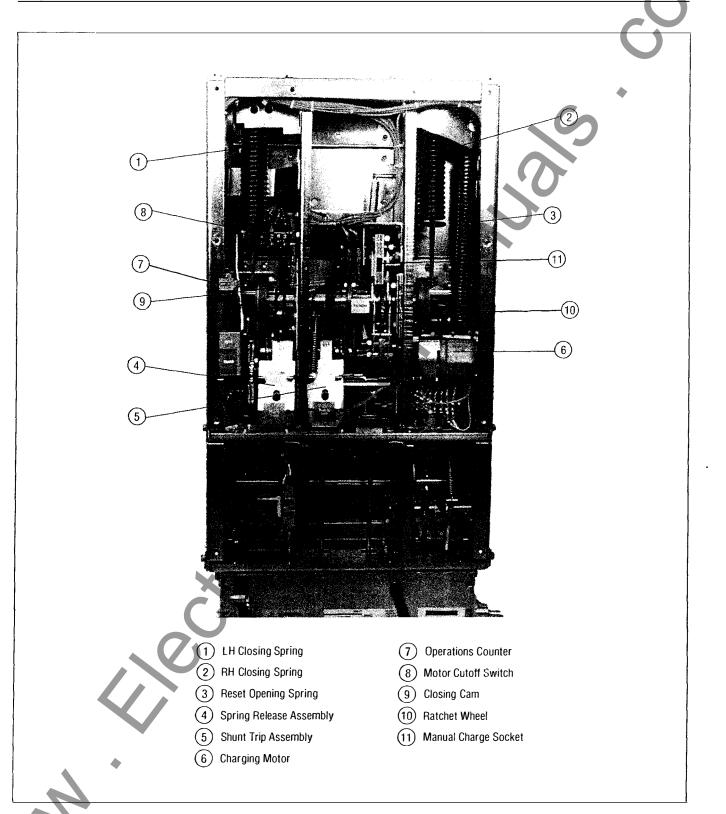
DHP-VR 5 kV Design - Front Faceplate Removed
